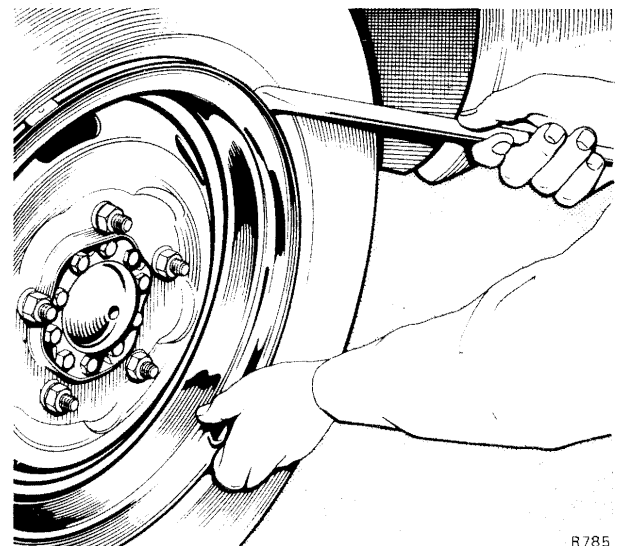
REMOVING A WHEEL TRIM (CORNICHE)
